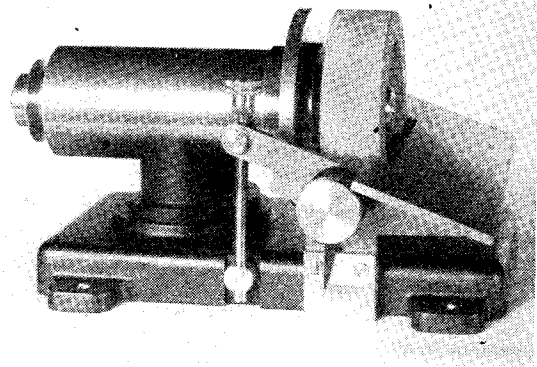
Showing the method of mounting the head and the arrangement of the tool rest
